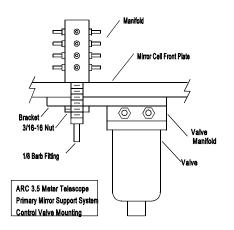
Mounting of control valves and manifolds on mirror cell face plate.
